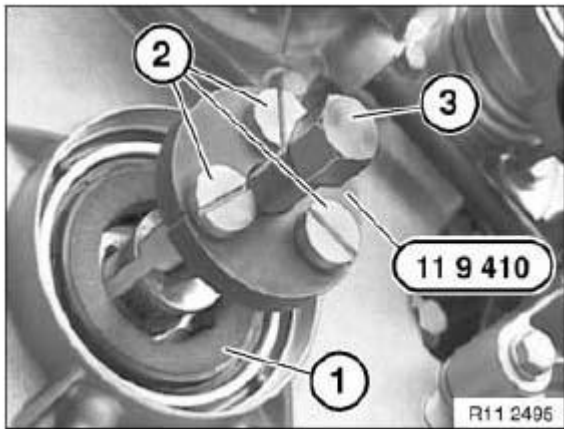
Removing Radial Shaft Seal With Special Tool (11 9 410)
